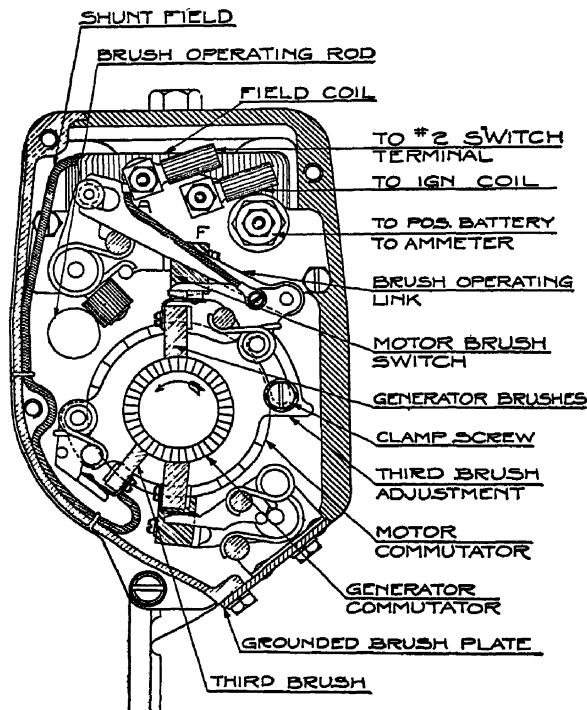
Sectional view of Delco motor-generator for Buick "Four" (1923-1924).
